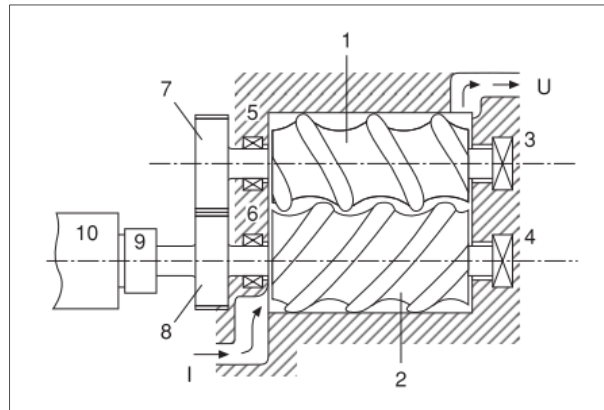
Rotary helical screw compressor (G Belforte, 2005)
